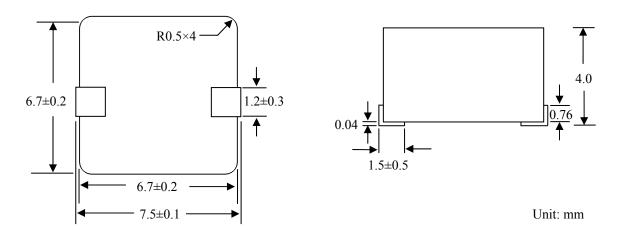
Mechanical Dimensions for ATIN-0740 Series Inductors
